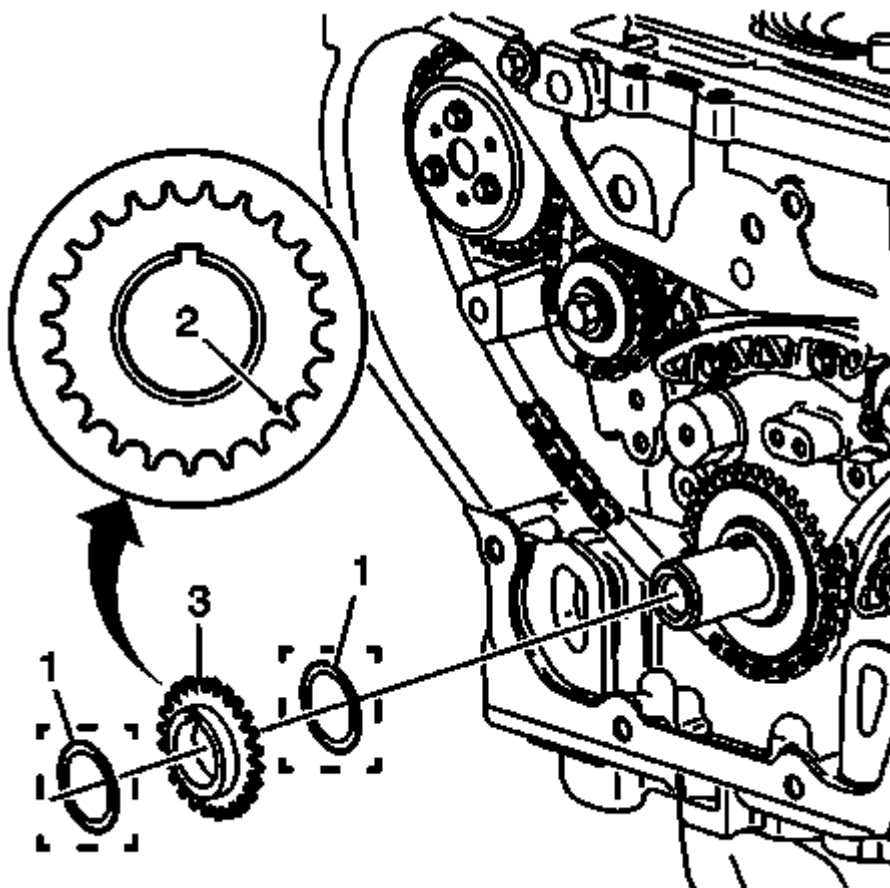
View of Friction Washer and Timing Chain Drive Sprocket
